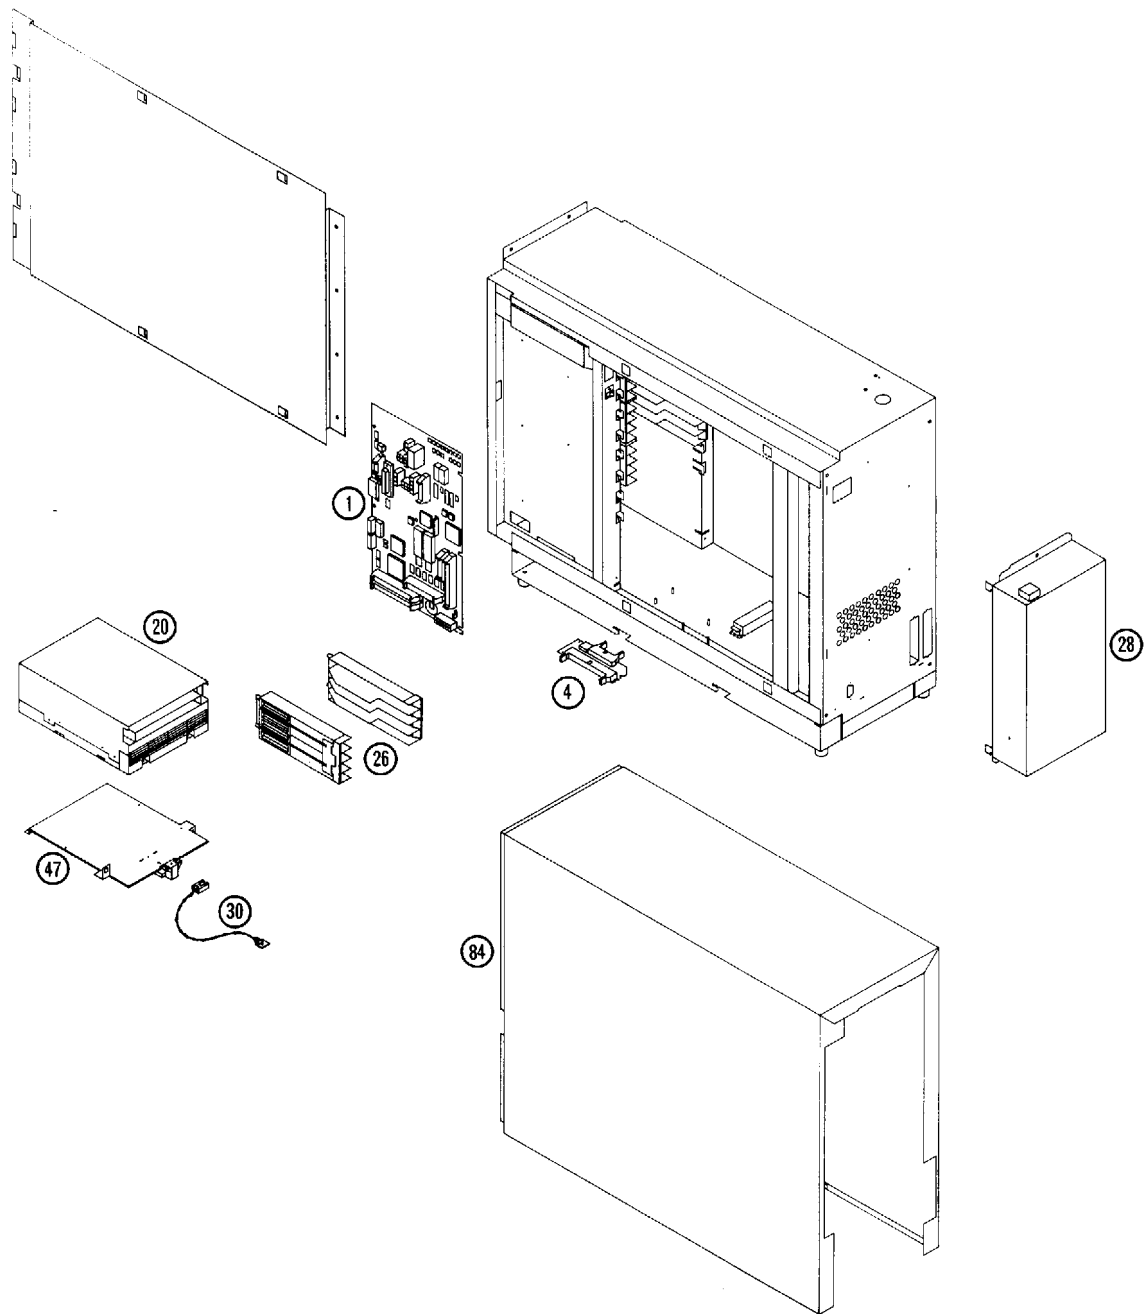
Optical Disk Library Exploded View (Sheet 2 of 3)
